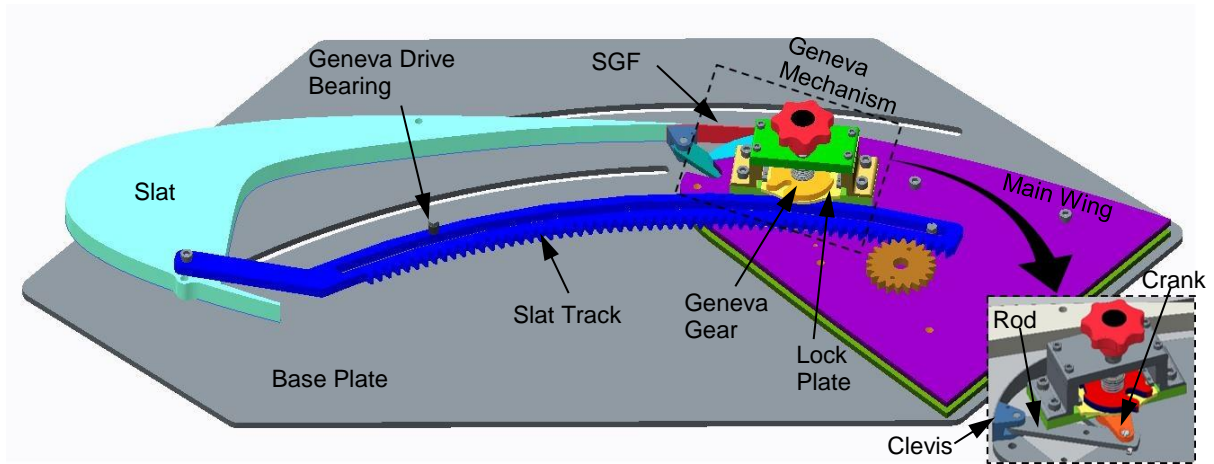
CAD model for the mechanized SGF benchtop model; SGF deployed. Inset shows retracted SGF & Geneva assembly without top-main-wing plate, revealing 3-bar mechanism: crank, rod and clevis.
